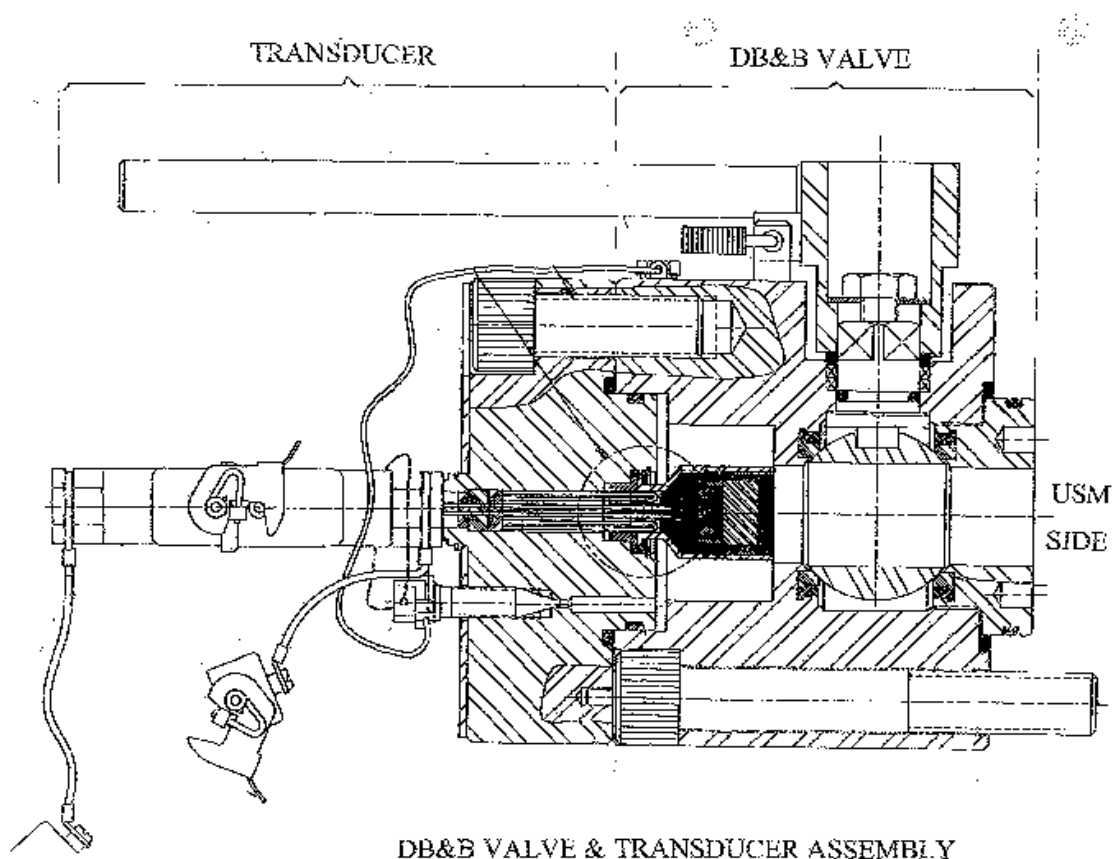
B / Double Block and Bleed valve with USM transducer assembly.
